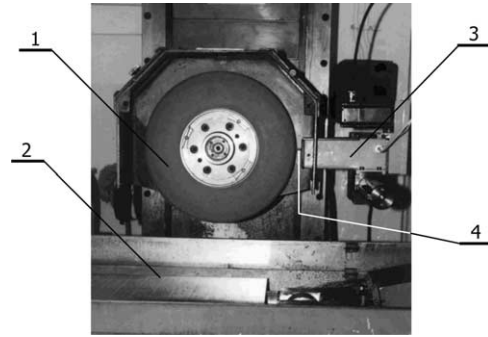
Measuring equipment fixed to the SPG 30×80 surface grinder: 1-grinding wheel, 2-grinder's table, 3-measuring device, 4-tester (thermocouple).
